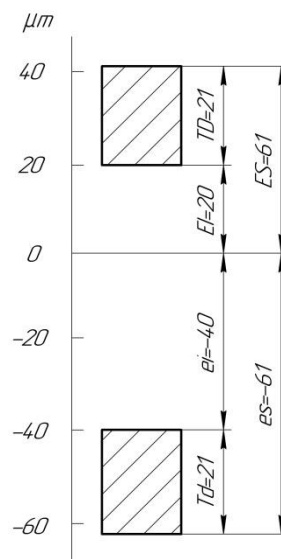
Is tolerances layout of the hole and shaft
